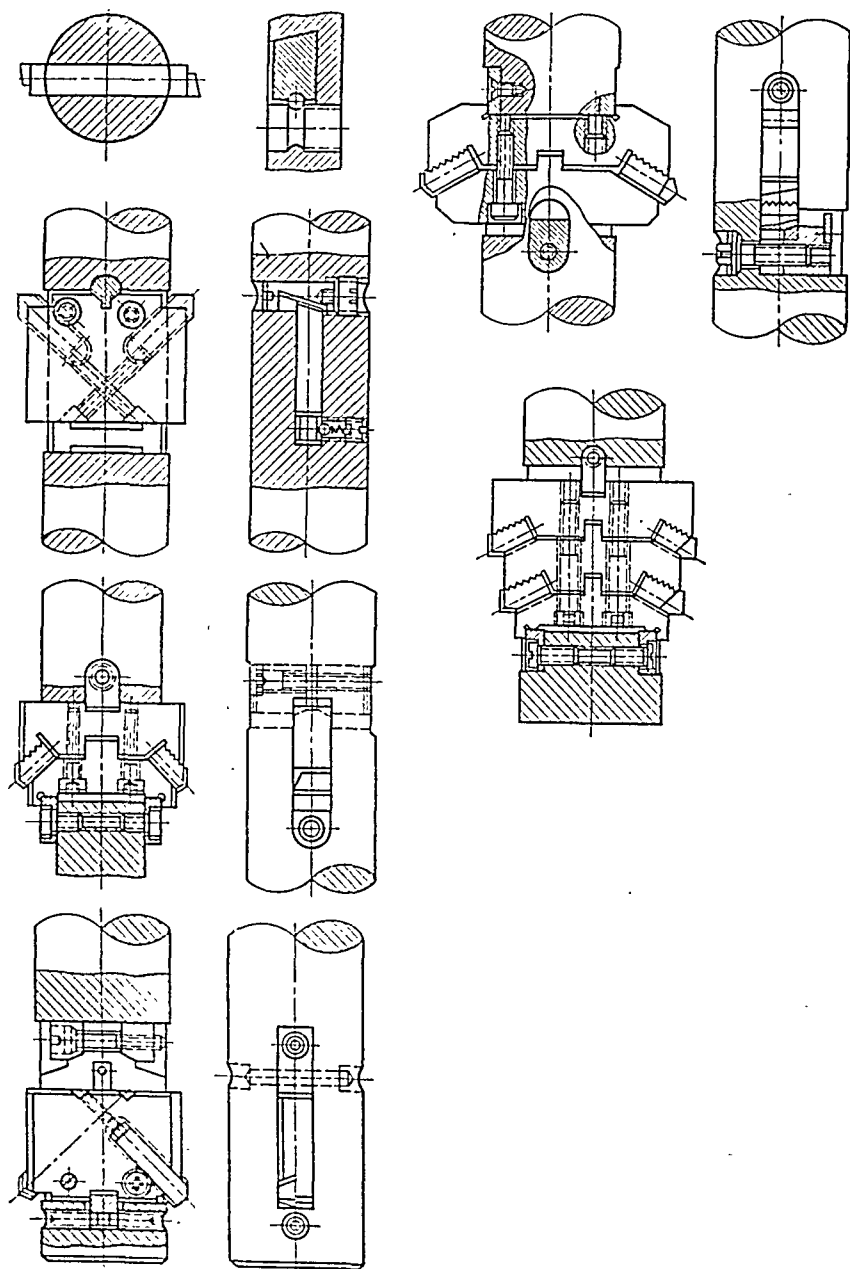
Methods of clamping block cutters and reamers in boring bars
